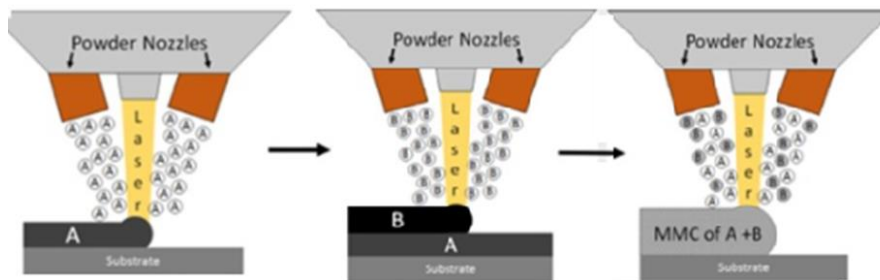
Schematic showing a Laser Metal Deposition process being used to create a compositionally graded component [67]–[70].
